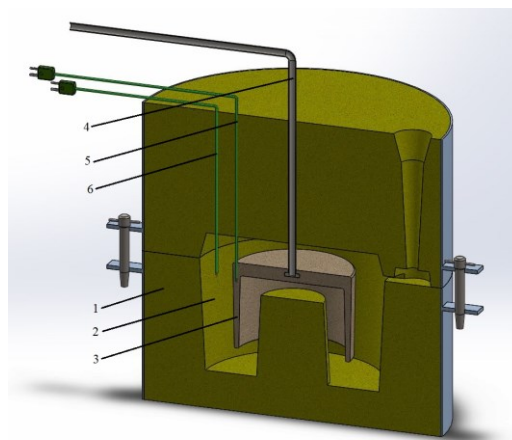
Conceptual diagram of the laboratory stand for testing the gas emission from the mould surface layer : 1- sand mould, 2 – cavity mould, 3 – core, 4 – collecting gases system, 5 – thermoelement 1 (in core), 6 – thermoelement 2 (in mould cavity)
